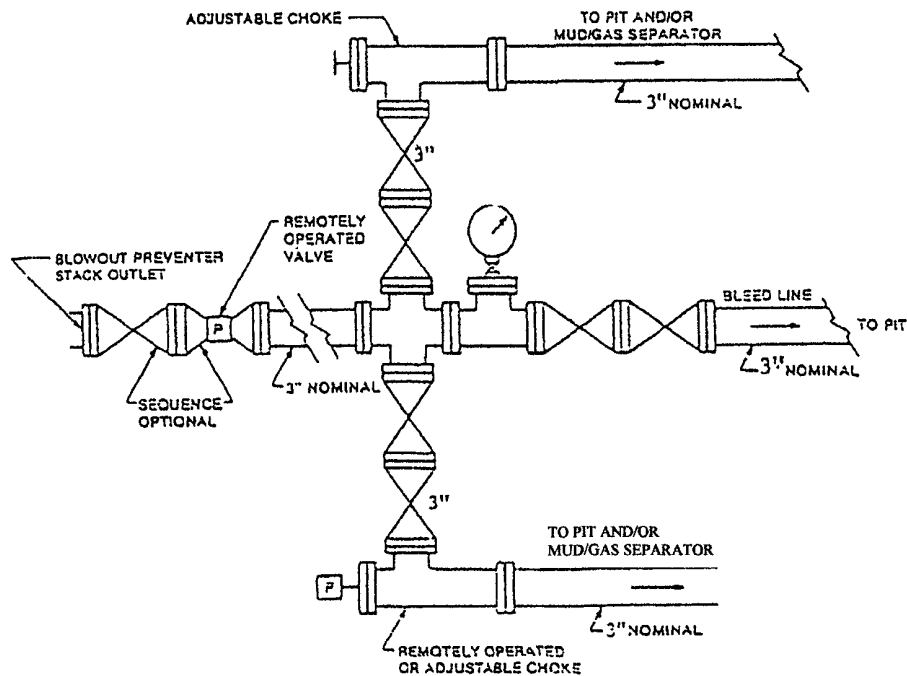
Typical choke manifold assembly for 5M rated working pressure service - surface installation
